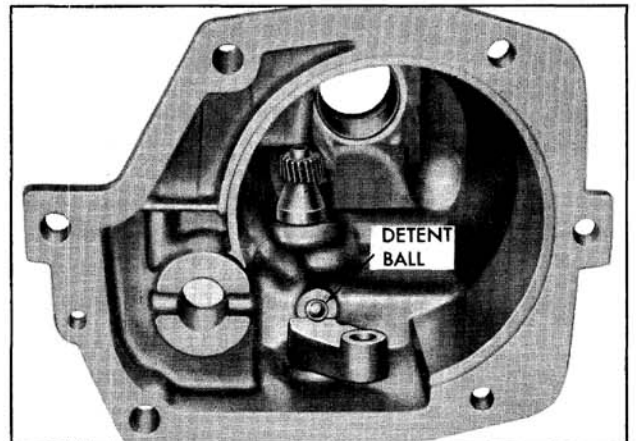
Installing Reverse Shifter Shaft and Detent Ball
